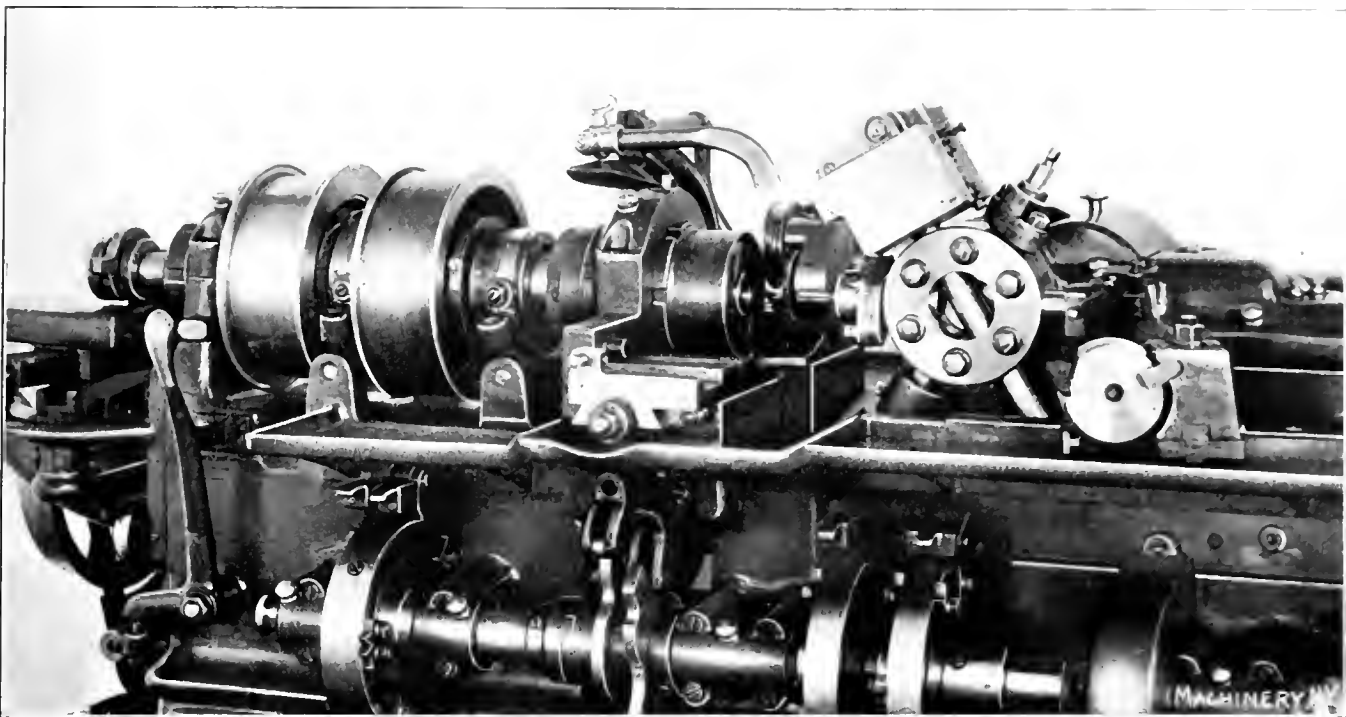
Automatic Screw Machine with Attachment for Cutting Helical Steel Gears
